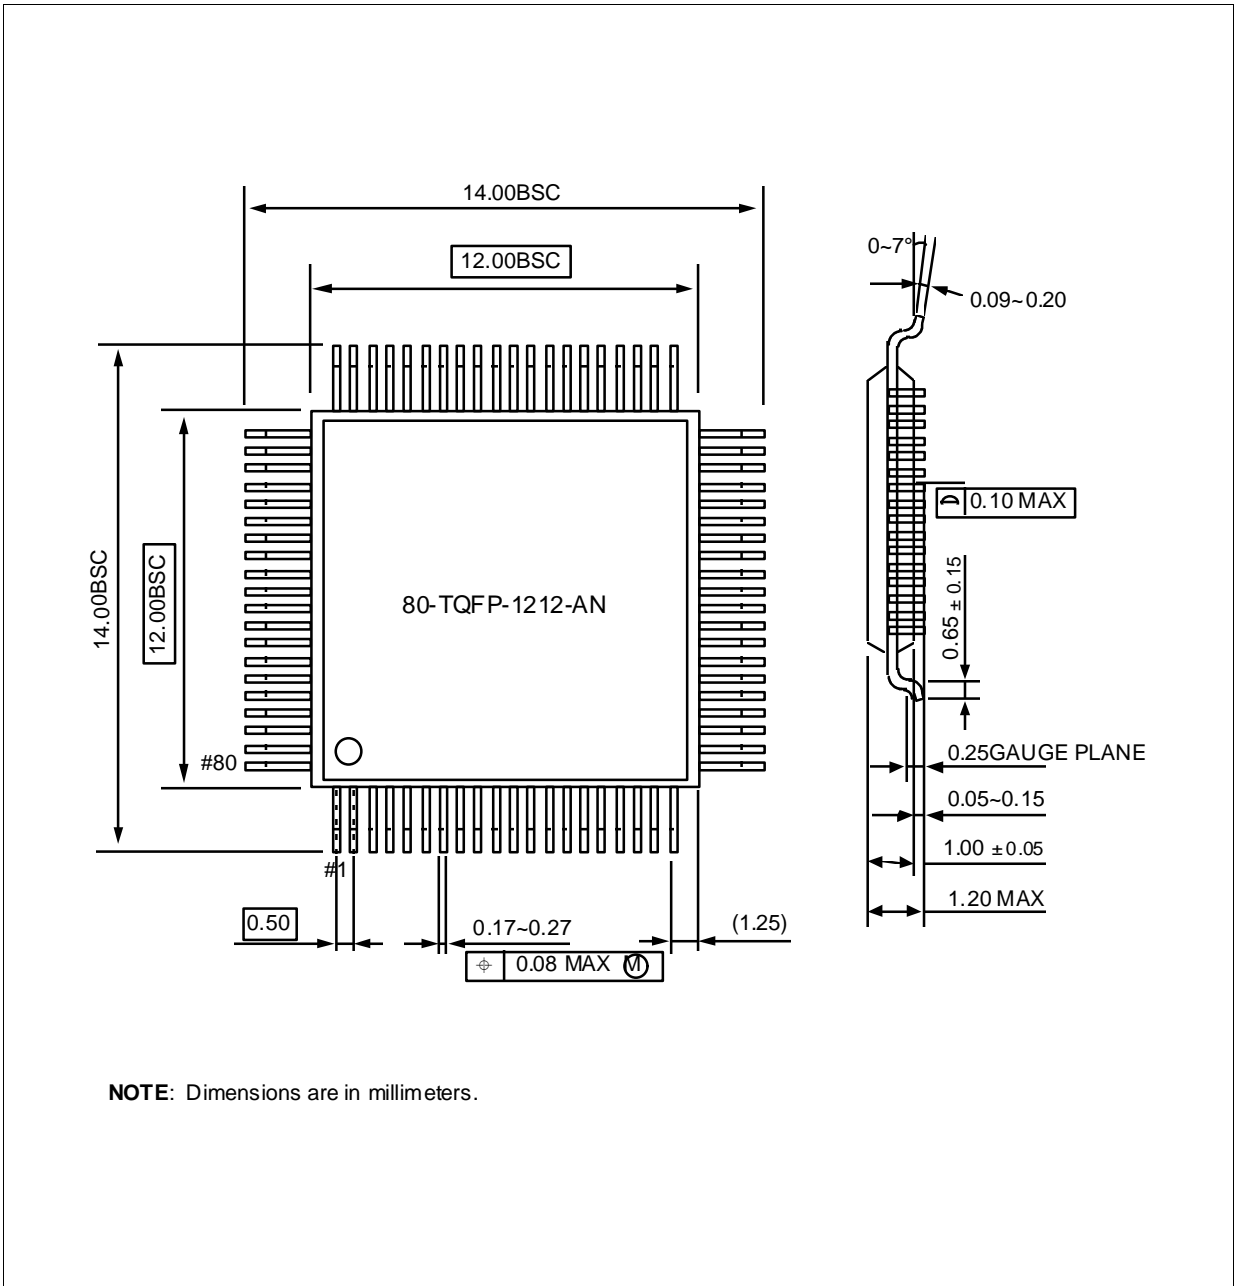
KS88C4404 TQFP Standard Package Dimensions (in Millimeters)
